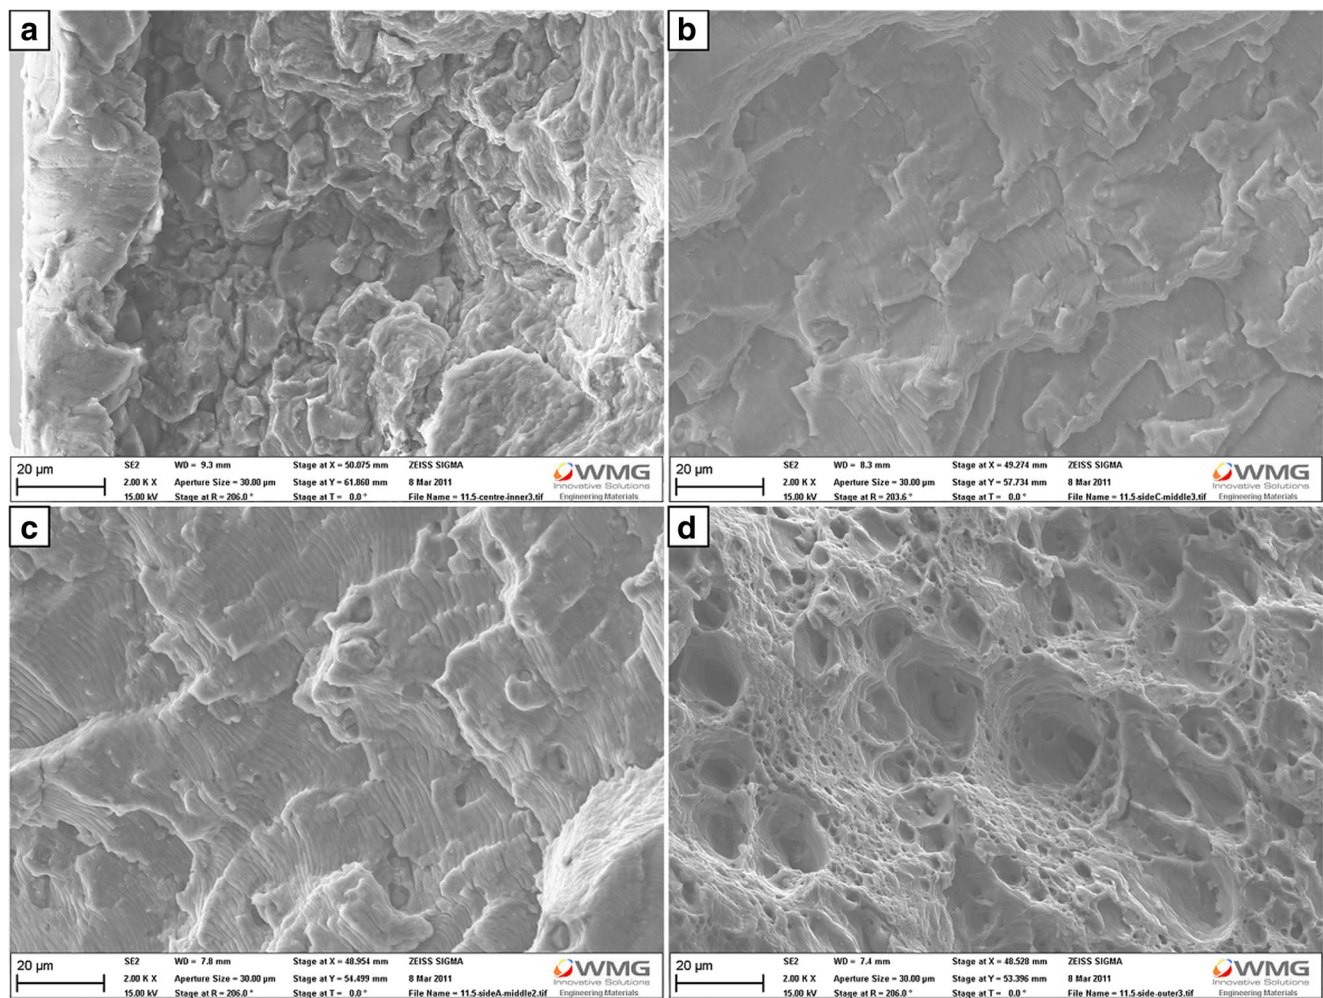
The SEM images of the fracture interface of a lap shear specimen with edge distance as 11.5 mm after the fatigue, a crack initiation, b, c crack development and d sudden break fracture interface [124]
